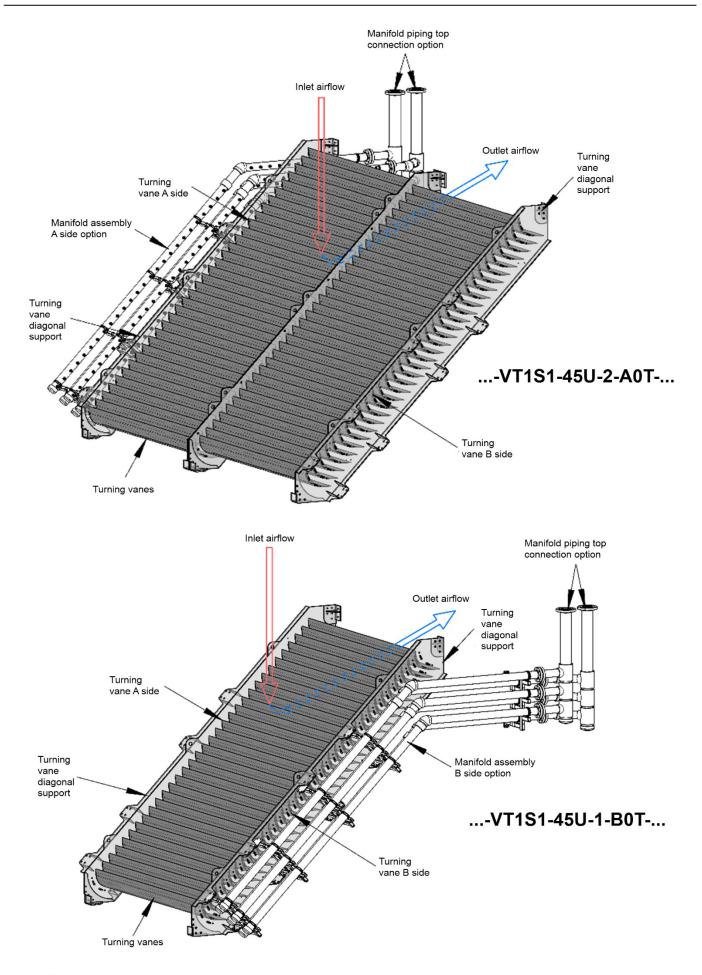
Turning section diagonal assembly (TTE-TSDA): 2-component example – manifold on A-side. 1 - component example – manifold on B-side. All examples have manifold top piping connection option. A bottom piping connection is also possible.
